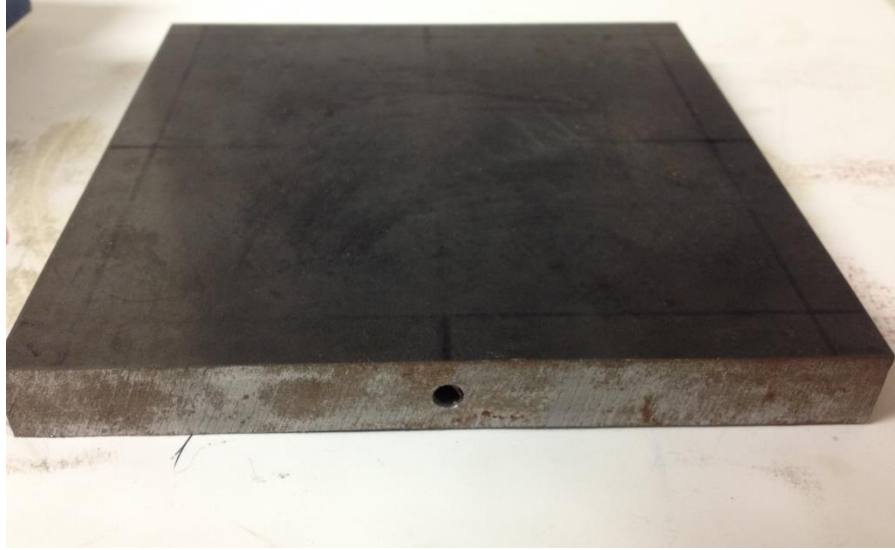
FBH1 Plate containing four 1/2" deep flat bottom holes
